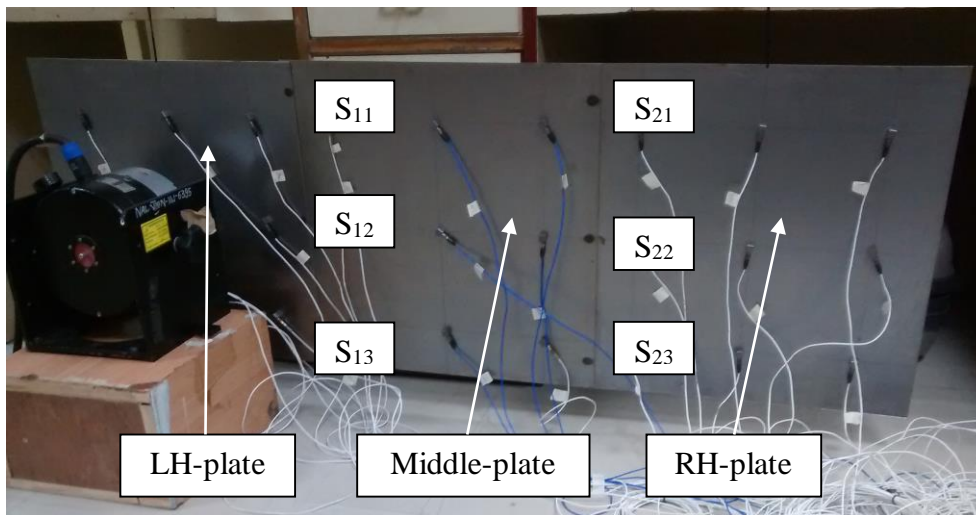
Three plates with spot-welded lap joints (healthy configuration: combination -1)
